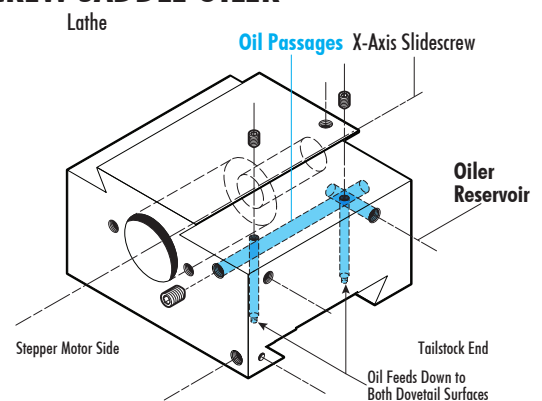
Oil passages for the ball screw lathe saddle are shown in blue.
